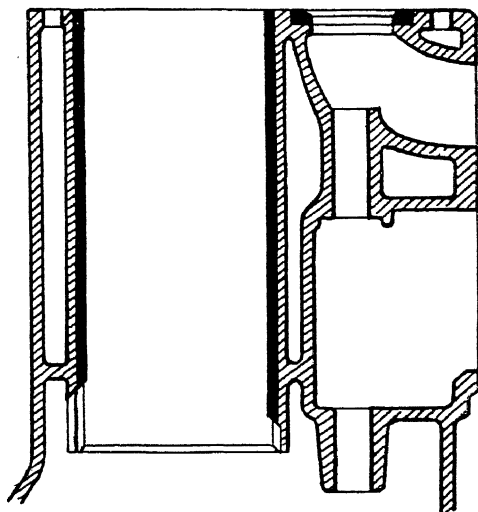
COMBINED CYLINDER BLOCK AND CRANKCASE
